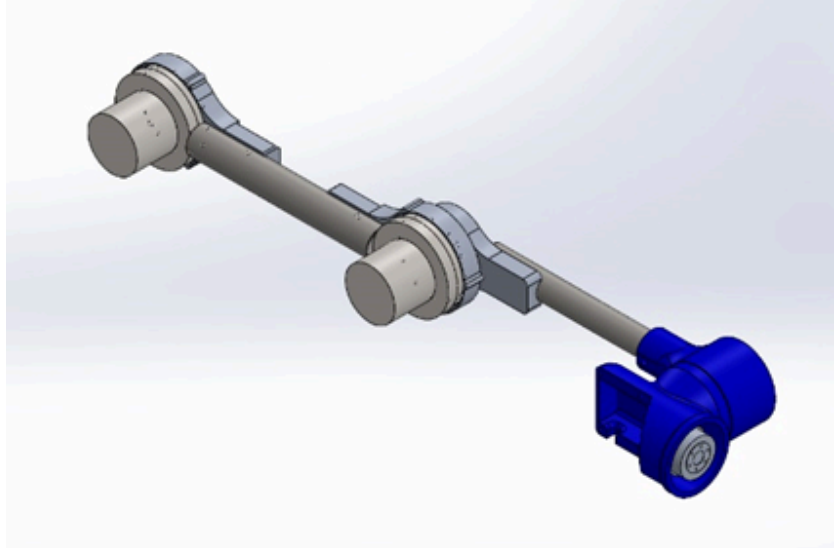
FEA Simplified Assembly for aluminum joint arm
